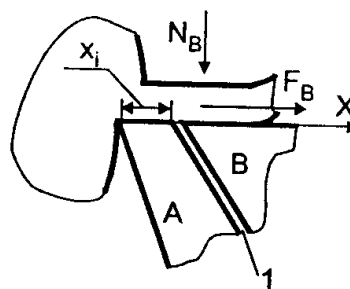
"Sectional tool" principle of action; 1 – slit between parts (plates) A and B
